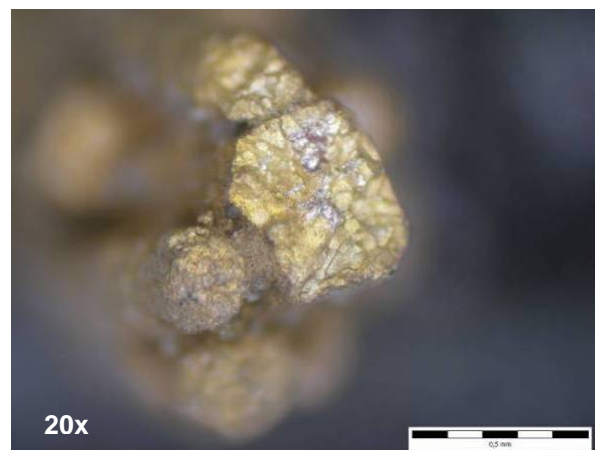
Fracture surface from the earring fragment 6.
